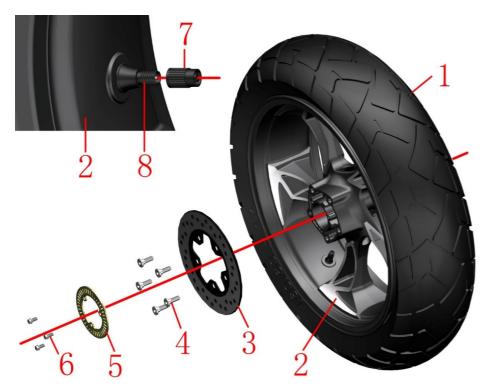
Rear wheel, swinging arm component		Rear wheel component 2	CHK	40)
